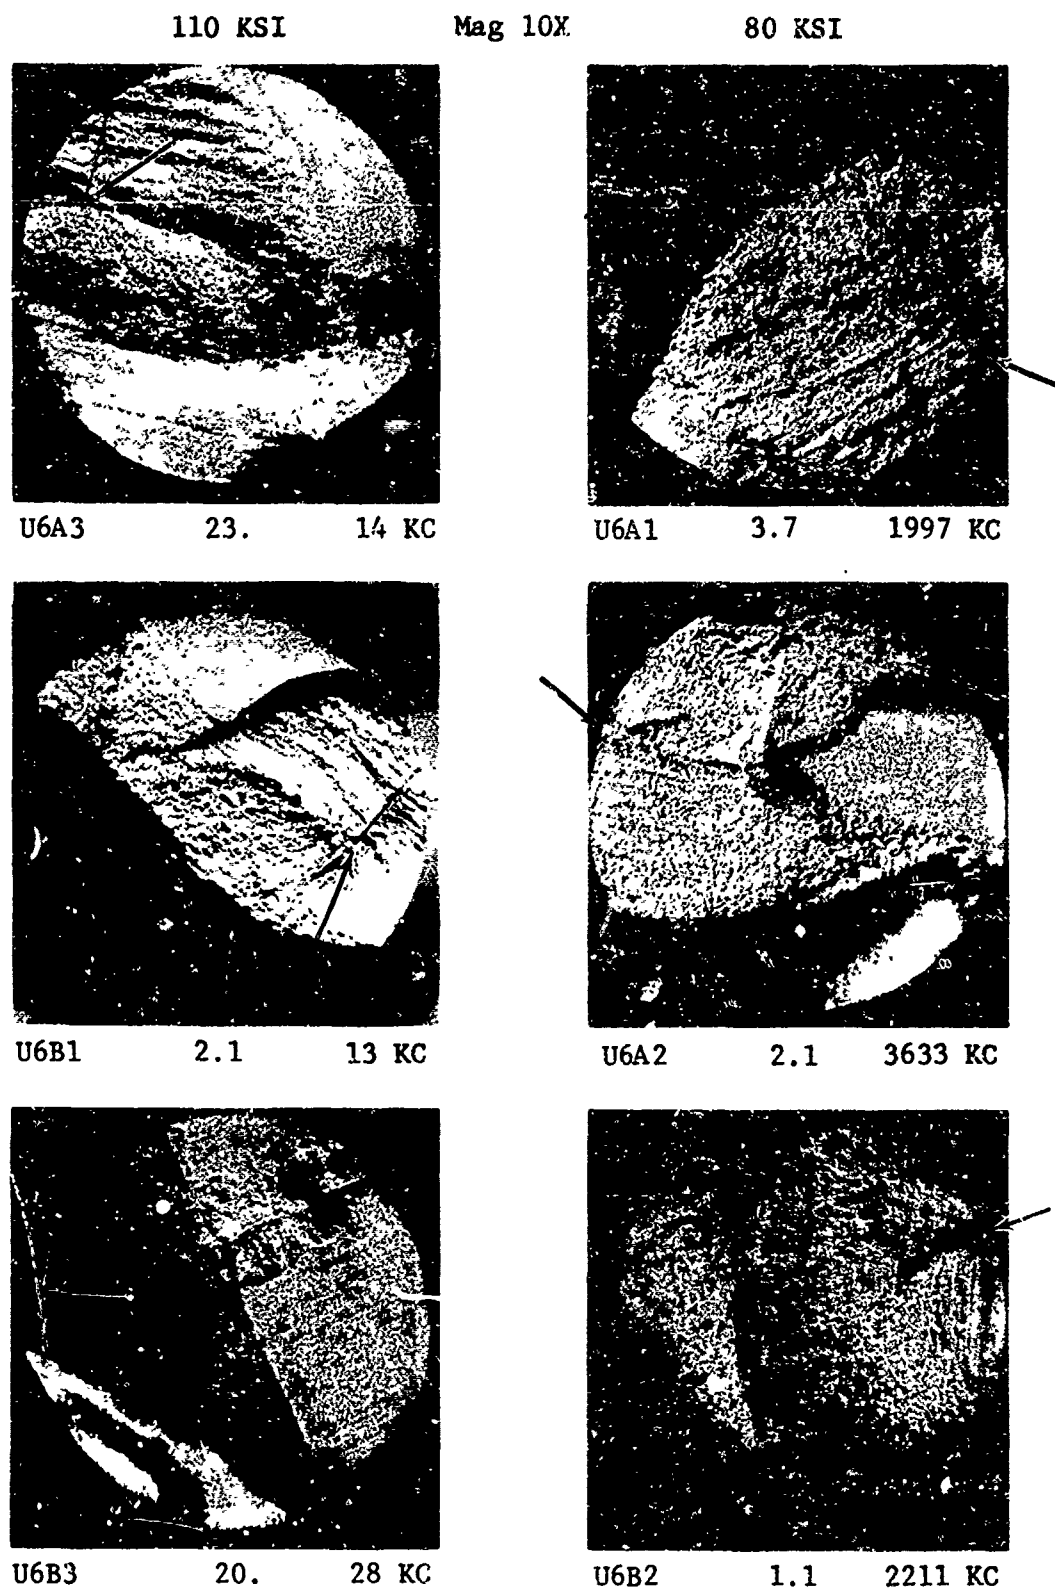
Fracture Surfaces of Failed Fatigue Specimens Series U6-Multiple-Bond/3-Axis Diffusion Bonded with .030" Tetragonal Corner Void
